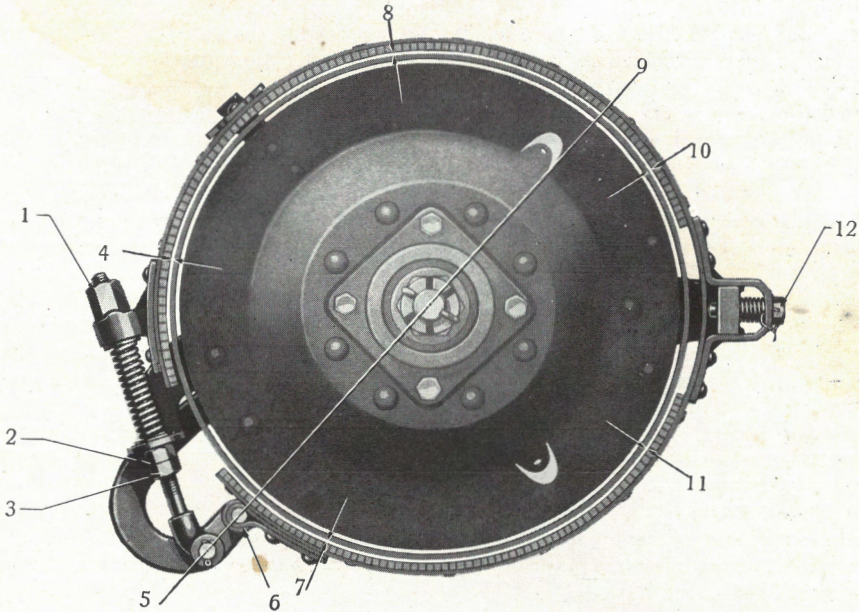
Wheel Brake Band Adjustment—Two-Wheel
